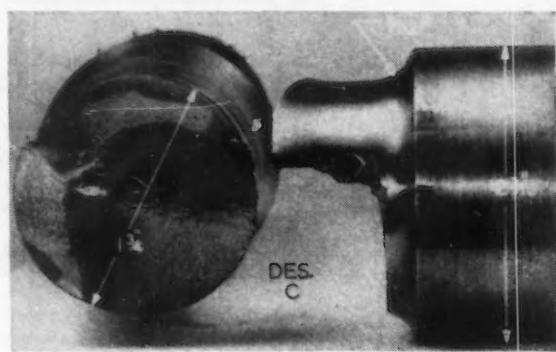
Typical fatigue fractures of shafts with different fillet radii.
